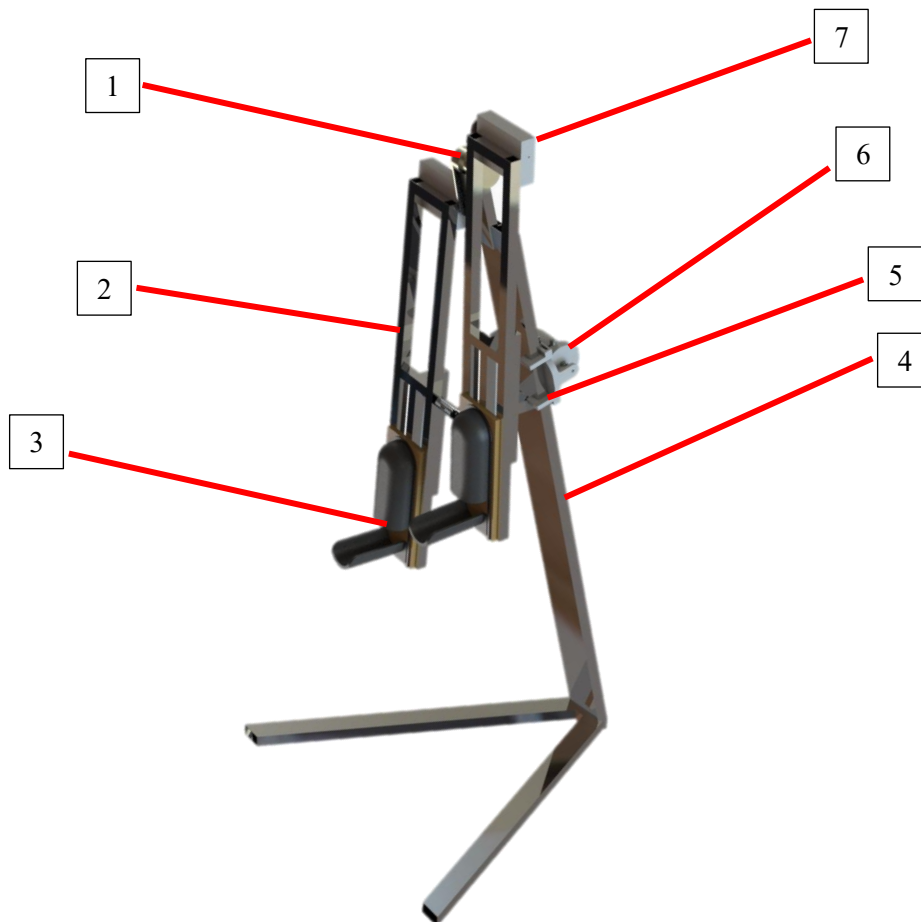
Design of the lower limb exercise device with 1) The crank and bearing subassembly, 2) The mechanical arms, 3) Foot attachment points, 4) The frame body, 5) The motor tension and adjustment mechanisms, 6) The motor and housing 7) The joint between crank and arms of the device
